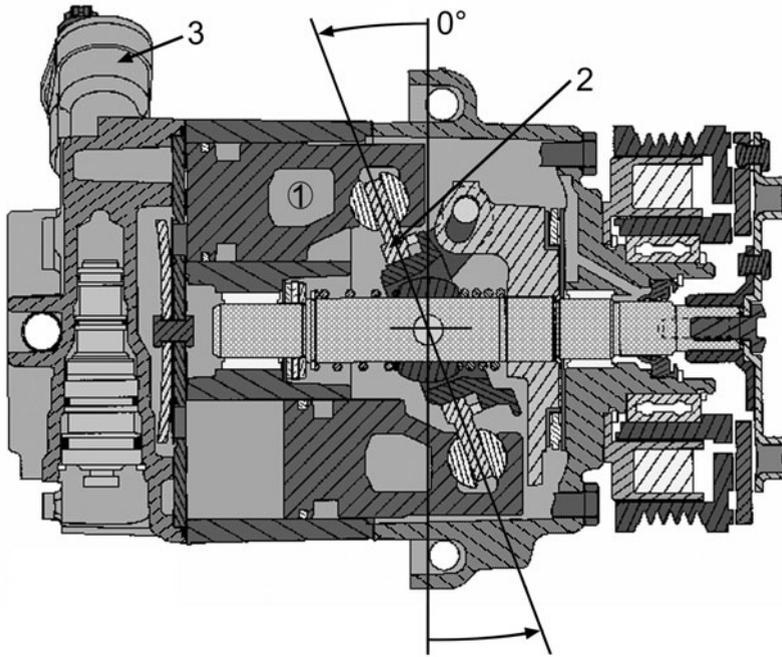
Axial rotating compressor with variable displacement. Parts: piston 1, cam 2, valve 3.
